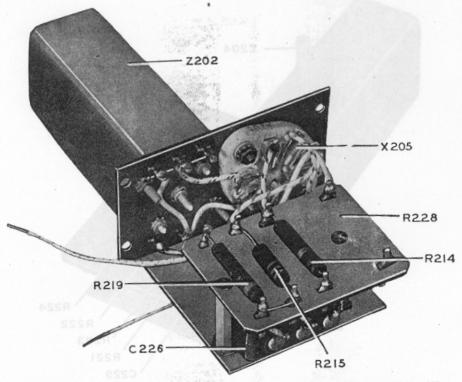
Receiver 2nd I-F Amp. Assembly—Bottom View
